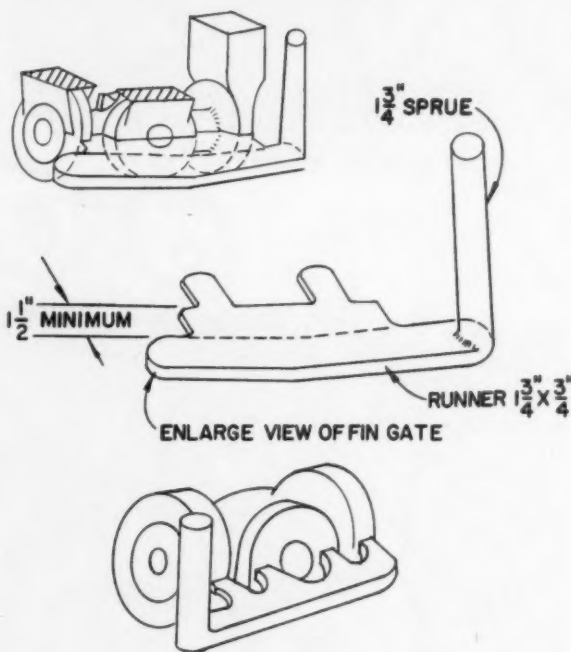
Unit below is former standard gating arrangement. Unit above is new gating set-up.
